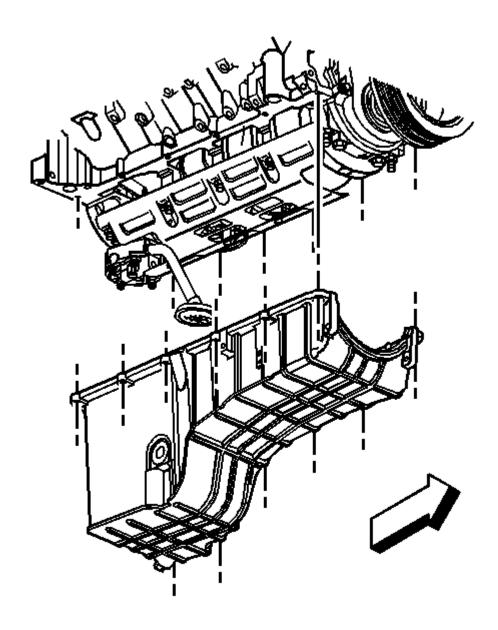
View Of Oil Pan Courtesy of GENERAL MOTORS CORP.
